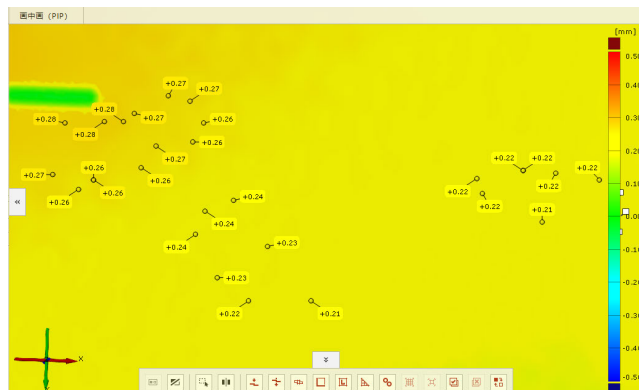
Surface inspection cloud image of sprayed developer defective sheet metal part after performing cross-complementary holes2.
